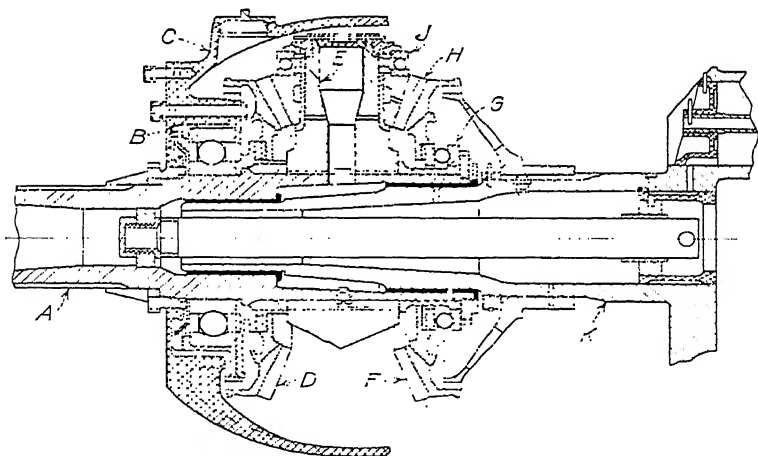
Arrangement of the Wright Cyclone 2 to 1 ratio bevel-type planetary reduction gear.
